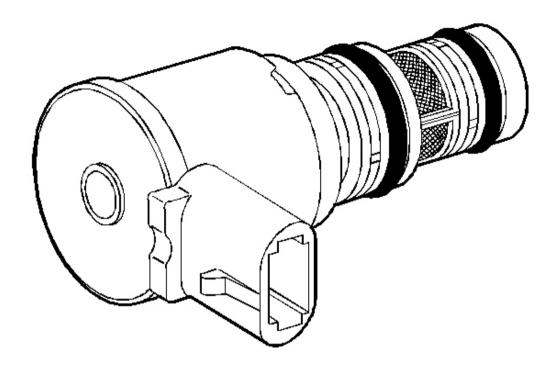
Torque Converter Clutch Solenoid Valve Courtesy of GENERAL MOTORS CORP.
